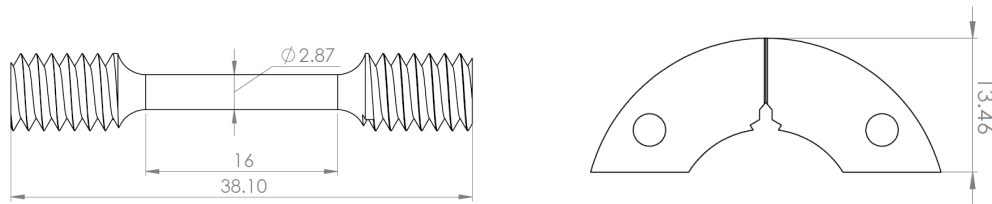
Drawings of threaded tensile specimens (left) and arc shaped fracture mechanics specimens (right). Dimensions in mm
